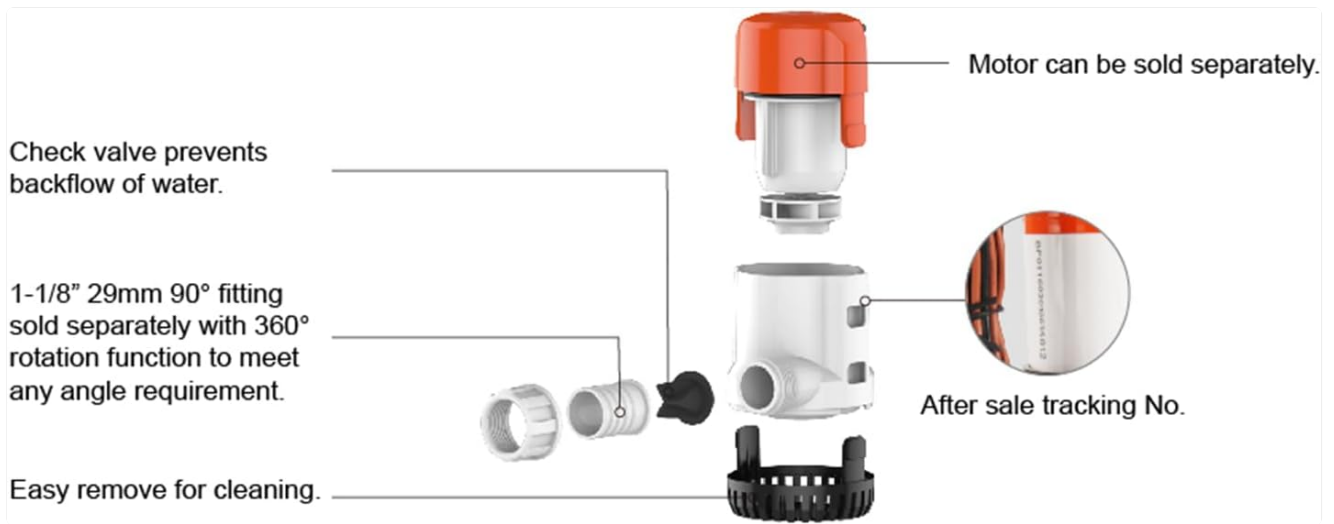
A more detailed exploded view, highlighting the check valve which prevents backflow, and showing optional 90-degree fittings with 360-degree rotation for flexible installation. The "After sale tracking No." label indicates a location for a serial or tracking number.
